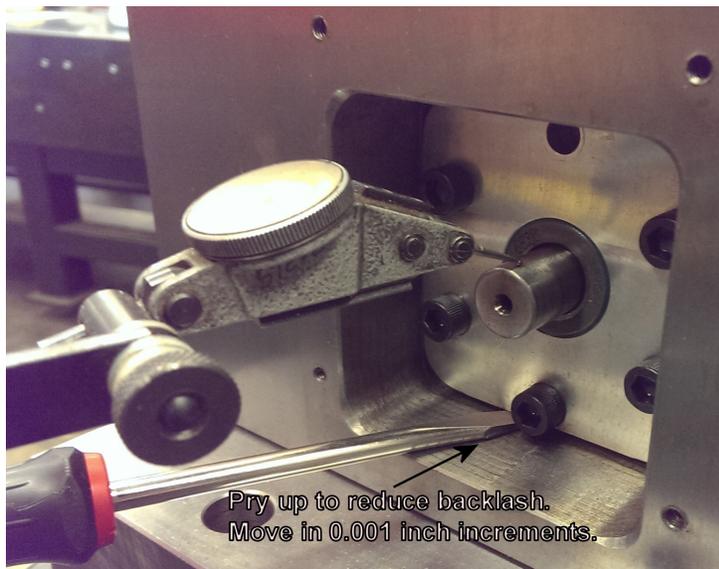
Pry up on bearing mount to reduce backlash, move in 0.001" increments, tighten, retest backlash at rotary table face.
